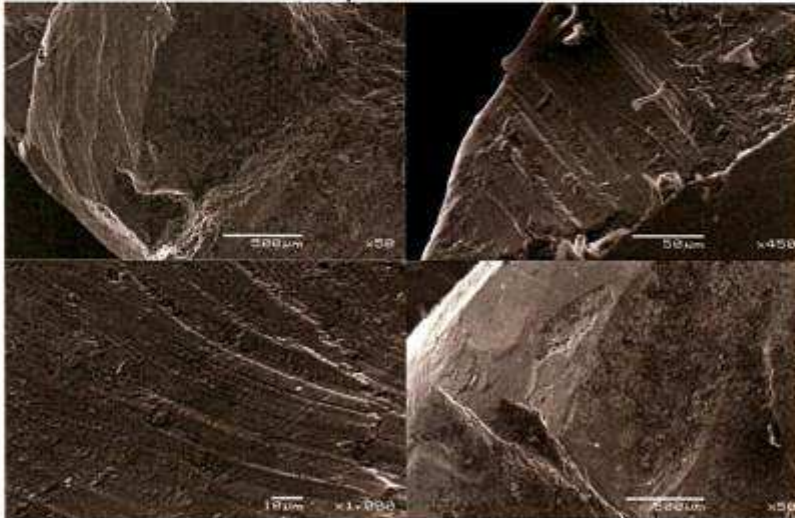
Fractographs - No 2 exhaust valve, stem end (x50 – x1000, SEM)
